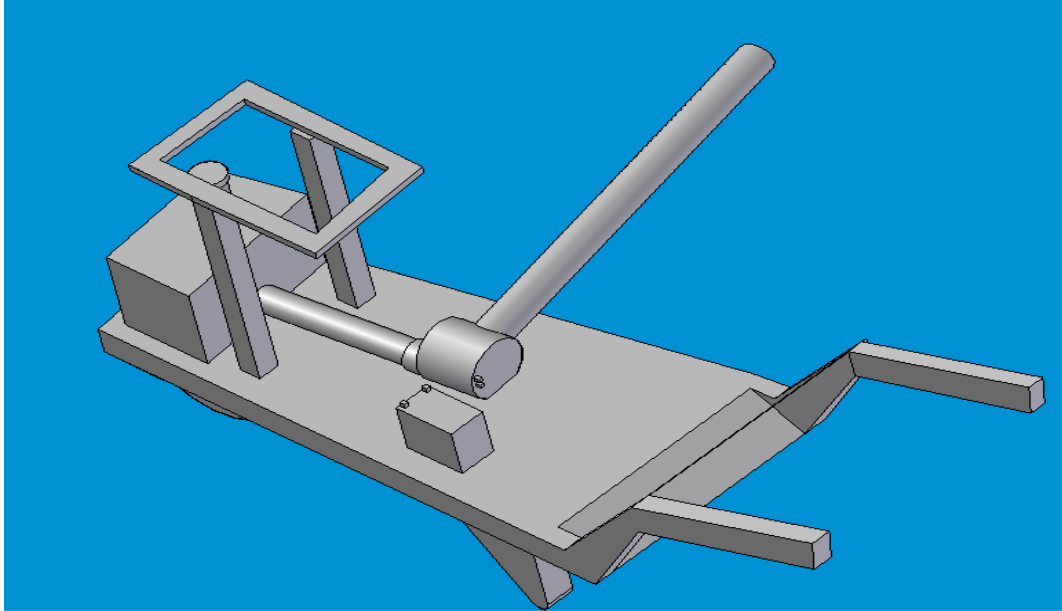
3: shows the fully assemble system parts without solar panel and nozzle
